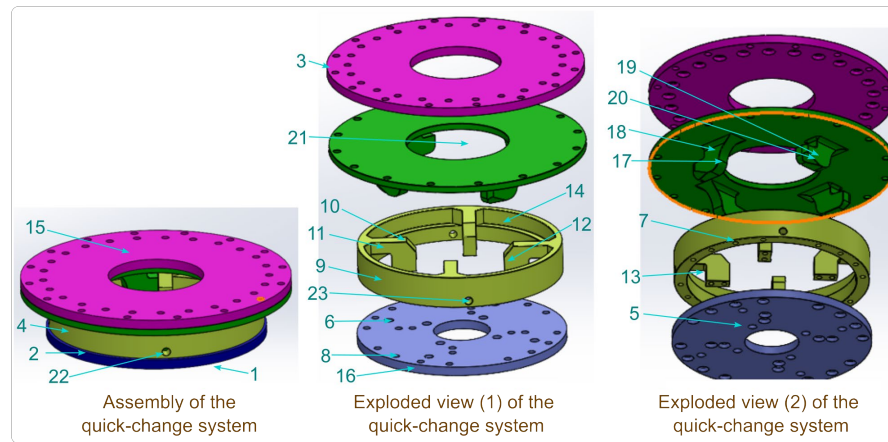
Computer-aided design assembly and exploded views of the proposed quick-change system
